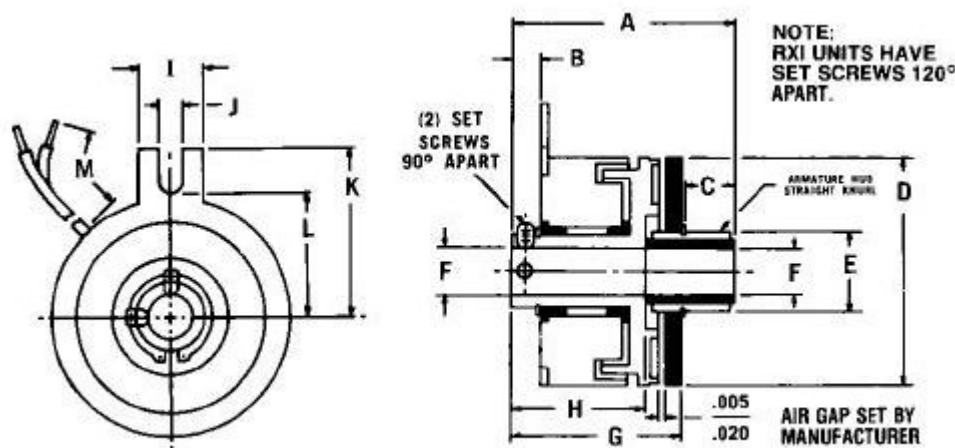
The Inch-bore Shaft Mounted Clutch
